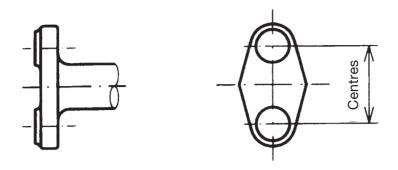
Tolerances for centre-to-centre dimensions
